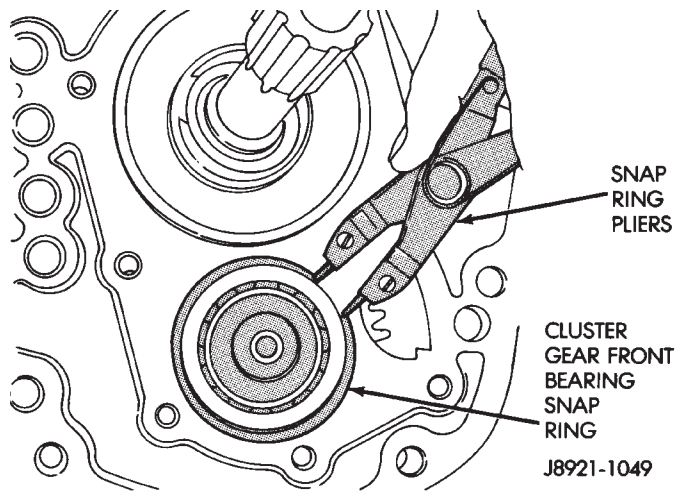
Removing Cluster Gear Front Bearing Snap Ring
